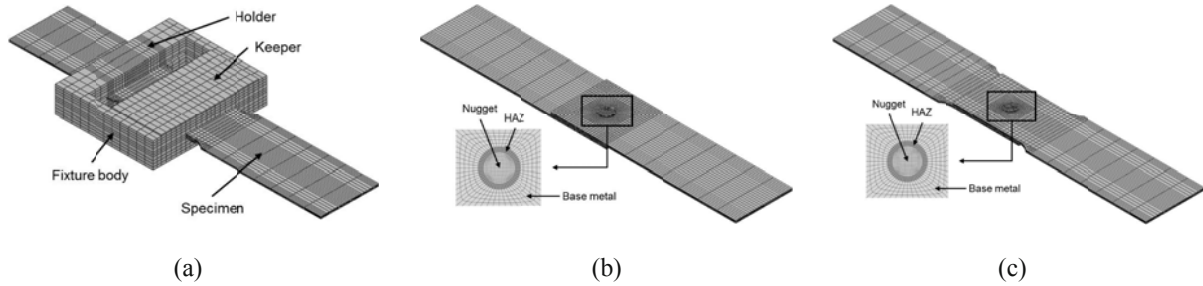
Finite element model for the analysis of the proposed fixture and the specimen: (a) assembled testing fixture with the specimen; (b) lap-shear test specimen; (c) proposed pure-shear test specimen.
